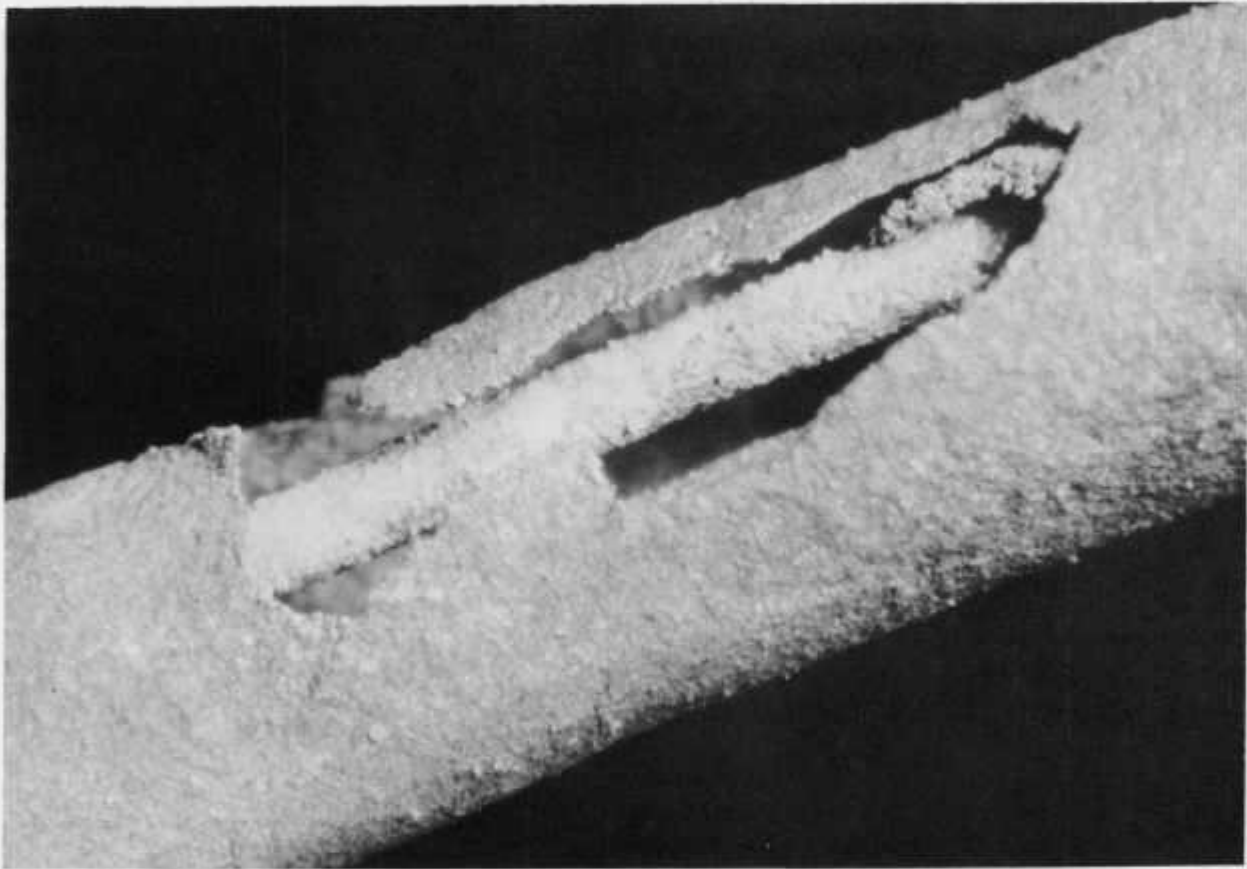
Corroded Section of Type 316 Stainless Steel Thermocouple Sheath Located Near Upper Tubesheet. Sheath thickness = 0.010 in. Mag: ~ 45X.
